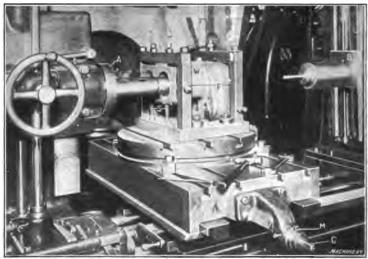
Boring a Duplex Cylinder on a Horizontal Machine
